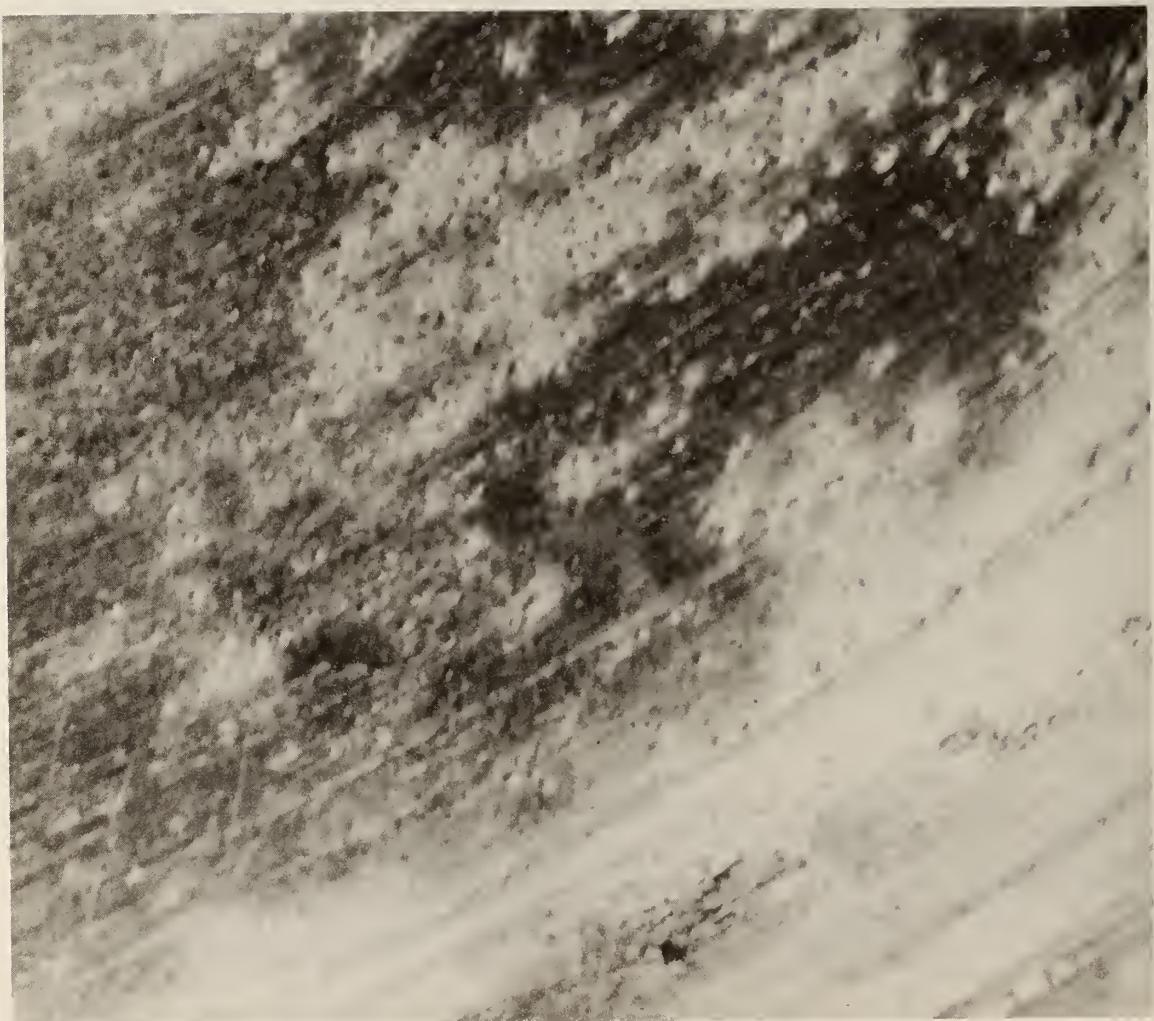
Photograph of Corrosion Patches to the Side of the Tap Hole of FE-5B After Tests Using Oiled Surfaces for Corrosion Inhibition
